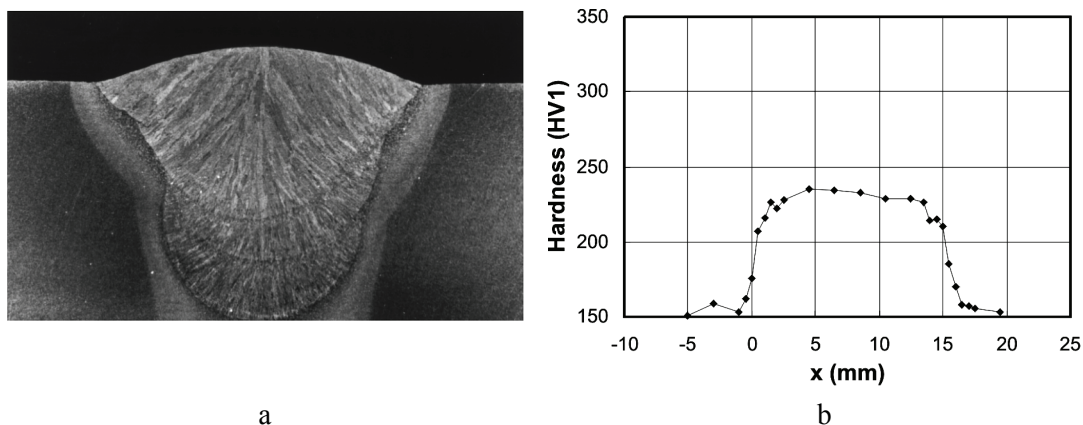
a) Cross-section of the weld; b) Hardness across the weld
